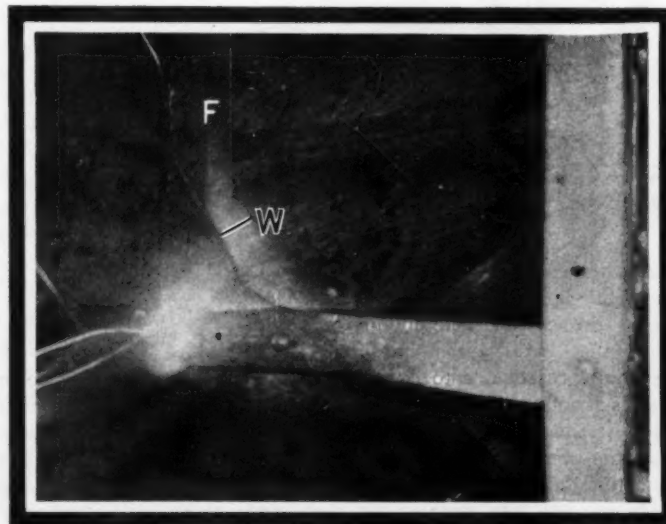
Welding the joints of a frame that had become loose owing to the rivets having spread
